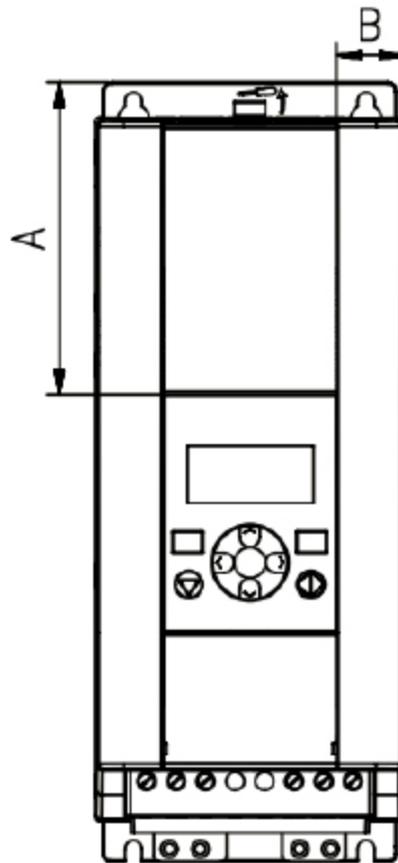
Vacon20 dimensions, MI2 - 3 Display Location
